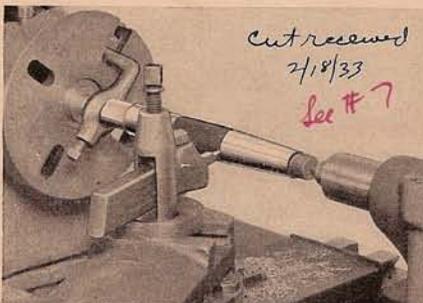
Turning a Taper on an Axle Shaft with Tailstock Set Over.
